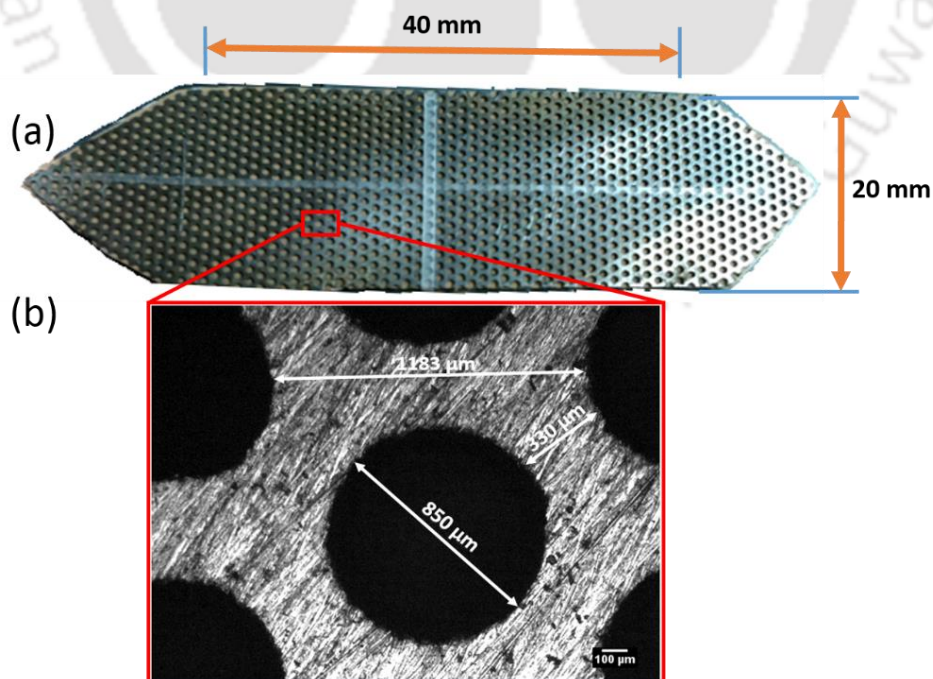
(a) Image of the porous plate having circular holes (holes along the marked cross strips are covered to get the desired fracture), (b) enlarged view of circular hole
